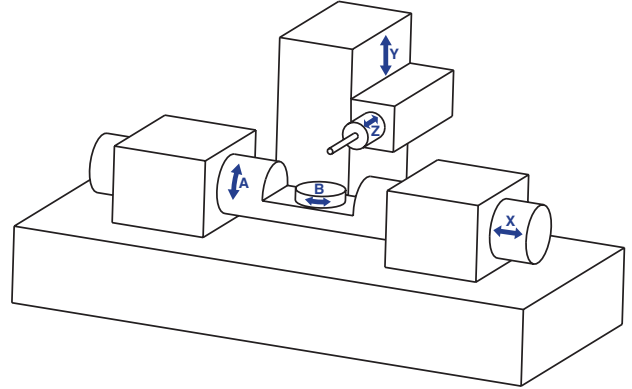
Envisioned 5-axis machine tool topology using two rotary-linear axes.
